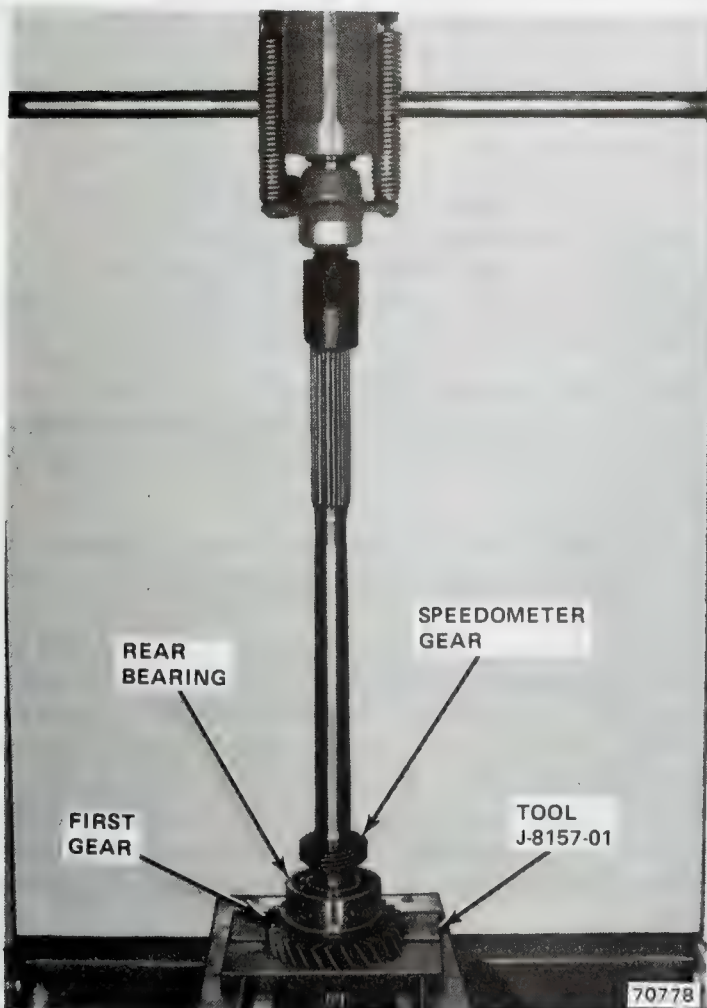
B-60 First Gear, Rear Bearing, and Speedometer Gear Removal
